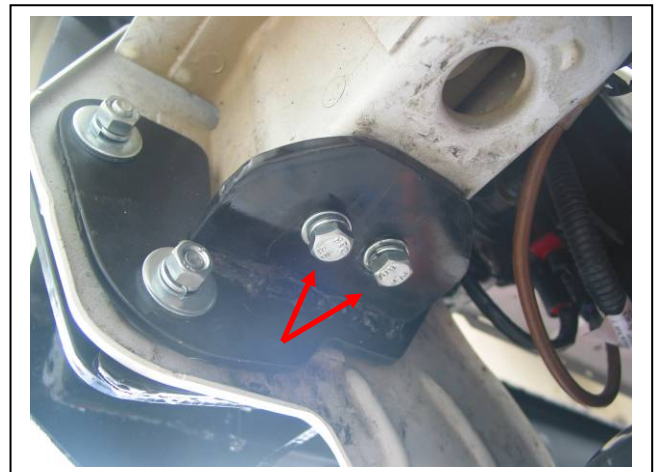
Chassis support attached to front of chassis. Passengers side shown.
